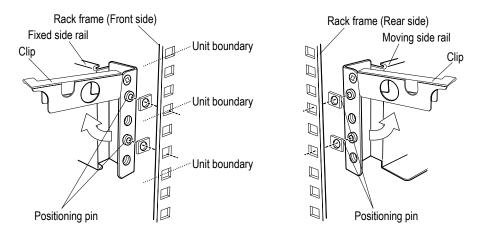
Removing Drive Box (2U) Installation Rails (for Square Hole) - 2
